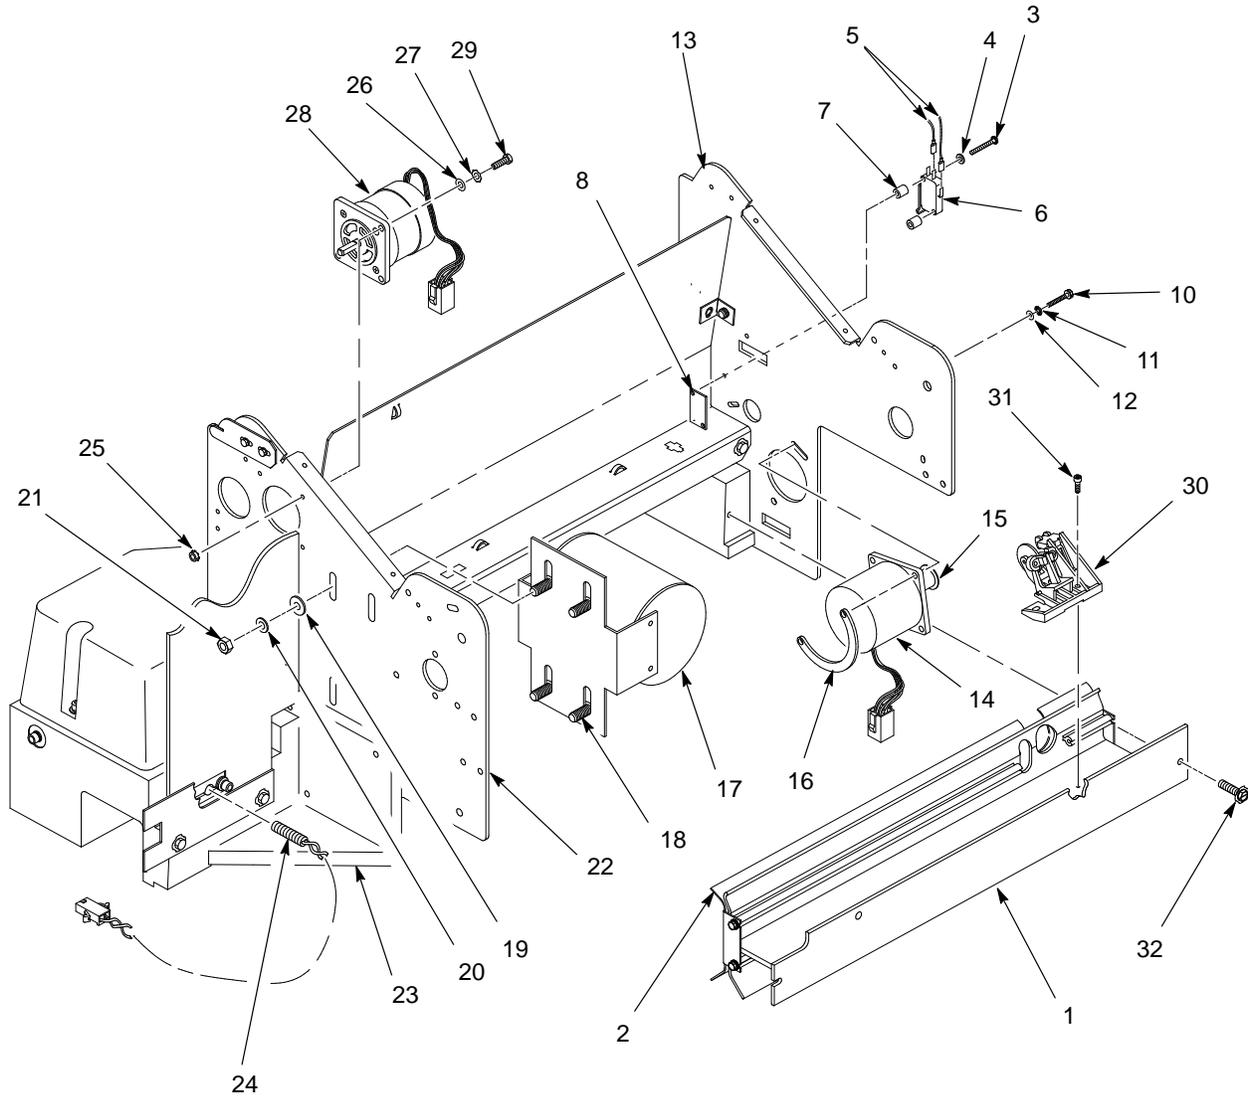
Paper Feed Motor, Platen Open Motor and Switch, and Paper Out Switch
